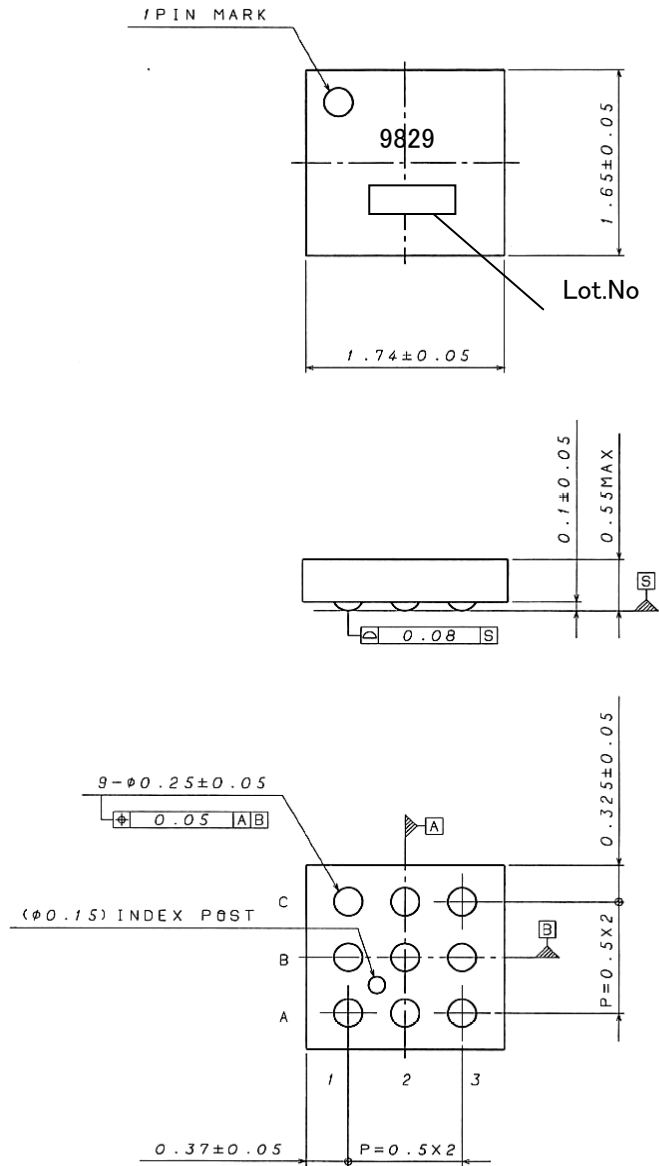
PHYSICAL DIMENSION VCSP50L1 (BU9829GUL-W)
